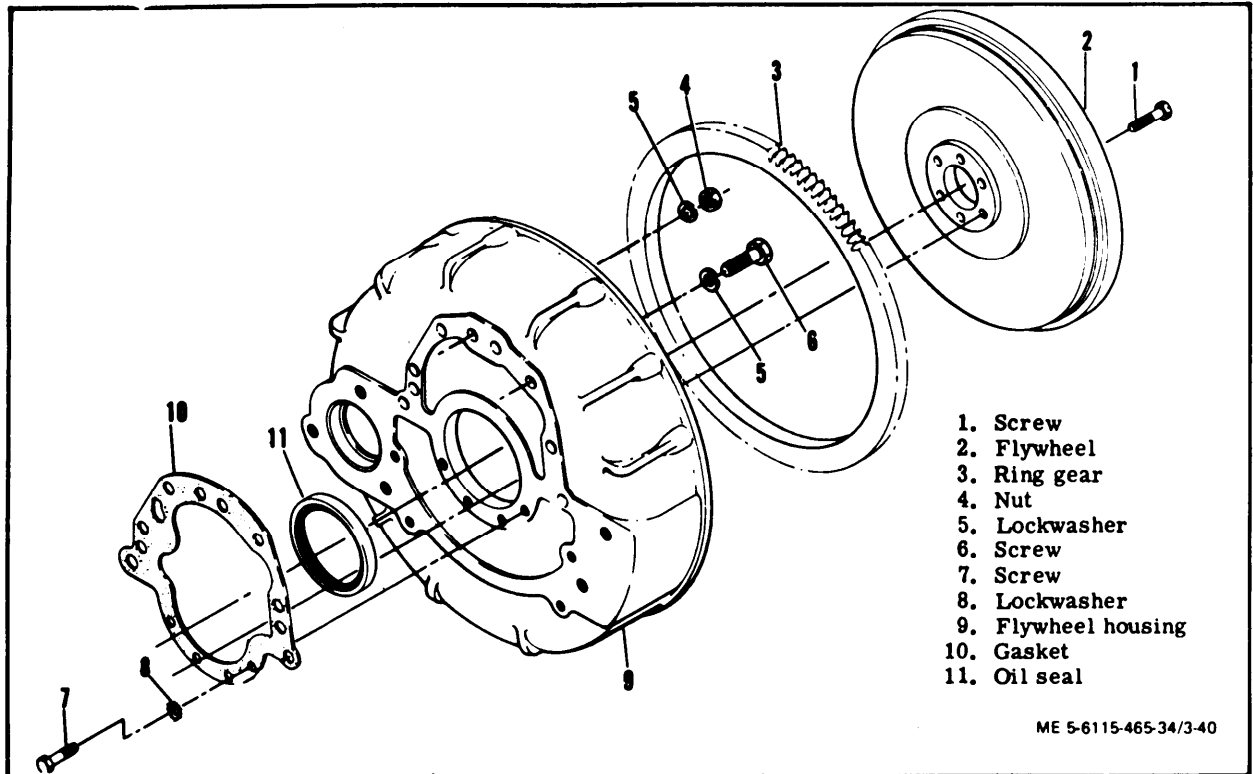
Flywheel and Flywheel Housing, Exploded View
